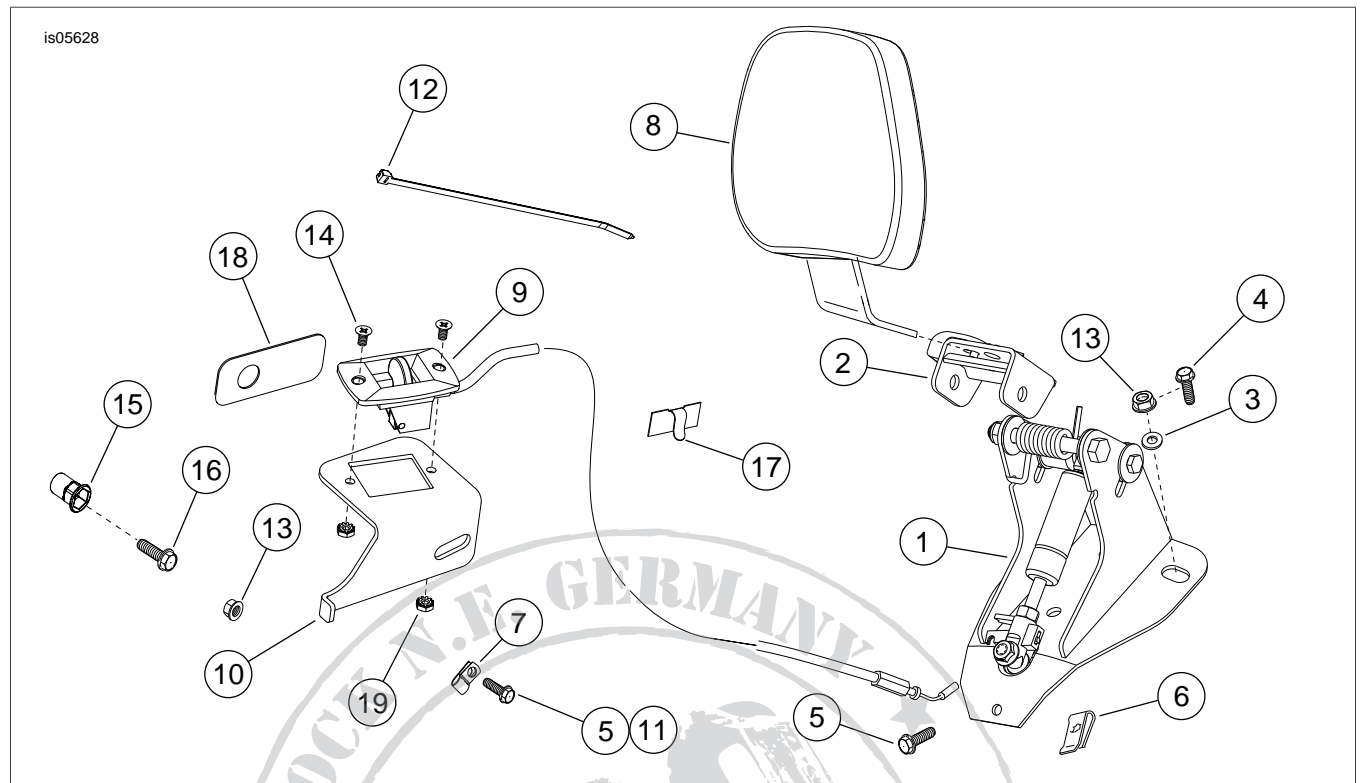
Service Parts: Adjustable Rider Backrest Mounting Hardware Kit
